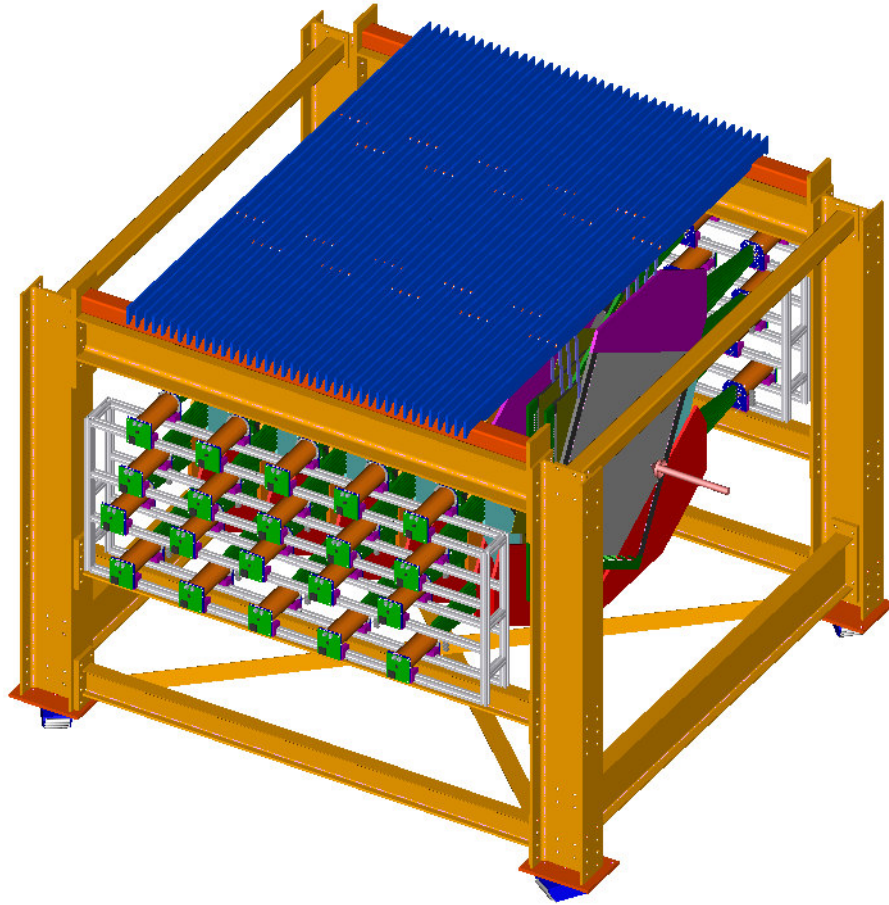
Minerva Test Beam Detector in Structural Steel Support Frame.
